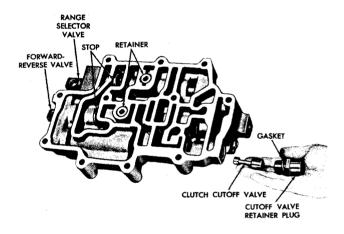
Removing (or installing) clutch cutoff valve components—later model
